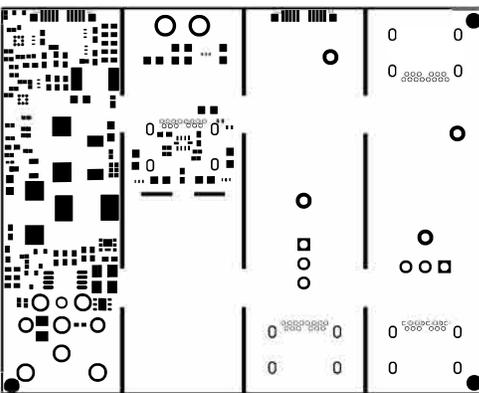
USB-C-PD-TKT-EVM Bottom Solder
